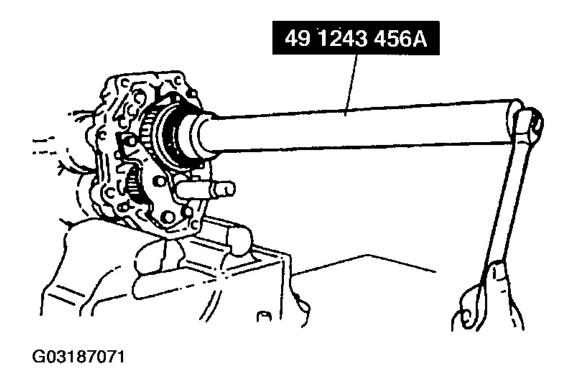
Removing Mainshaft Locknut Courtesy of MAZDA MOTORS CORP.
